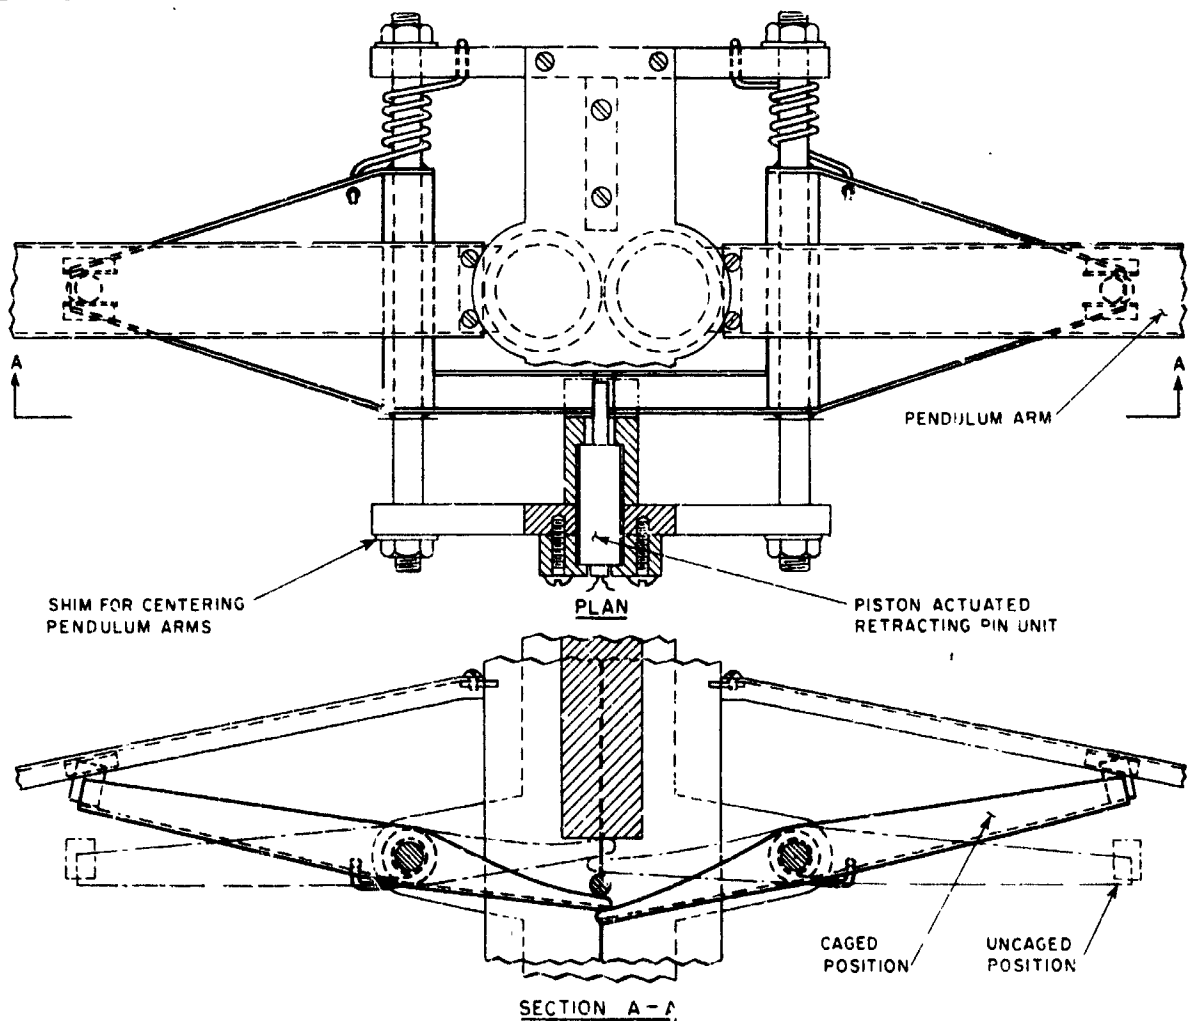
Nutation Damper Caging Device No. 2, Partial Assembly.
